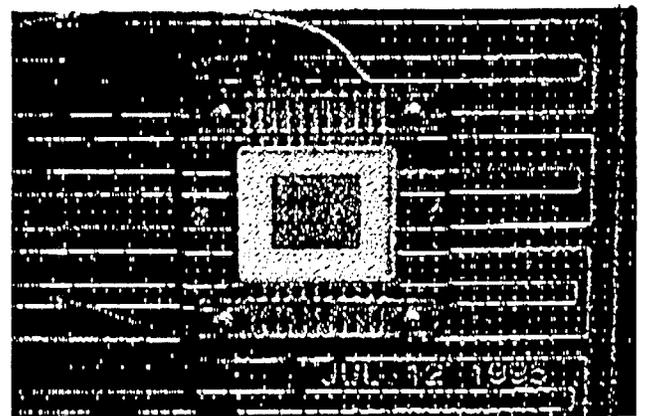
Photo of an assembled accelerometer mounted in its package and to a circuit board.
